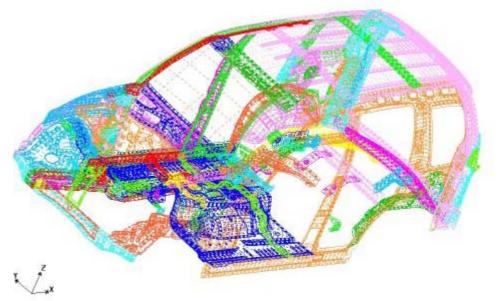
Full BIW CAD Surfaces (102 parts, 20958 Surfaces)
